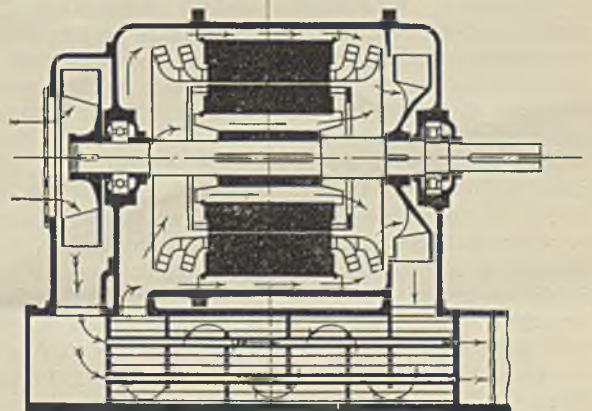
Sectional Drawing of Radiator-cooled Totally-Enclosed Motor.
